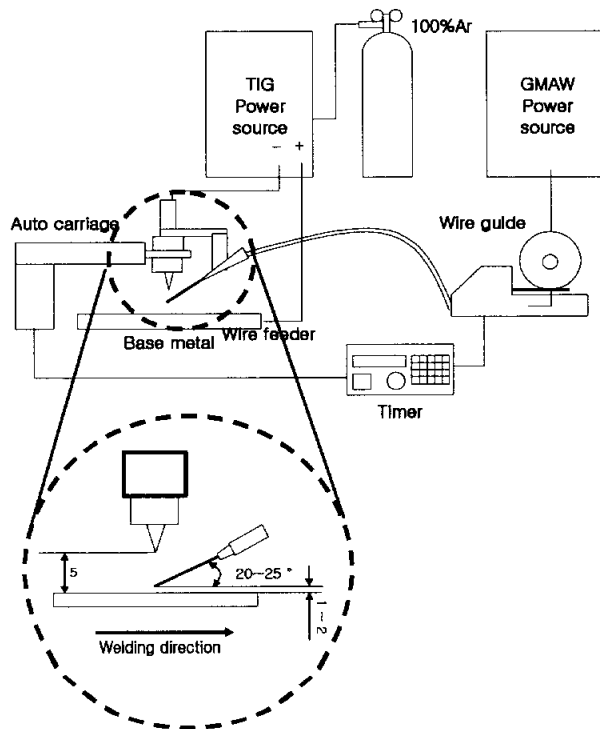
Schematic of filler wire TIG welding experiment
